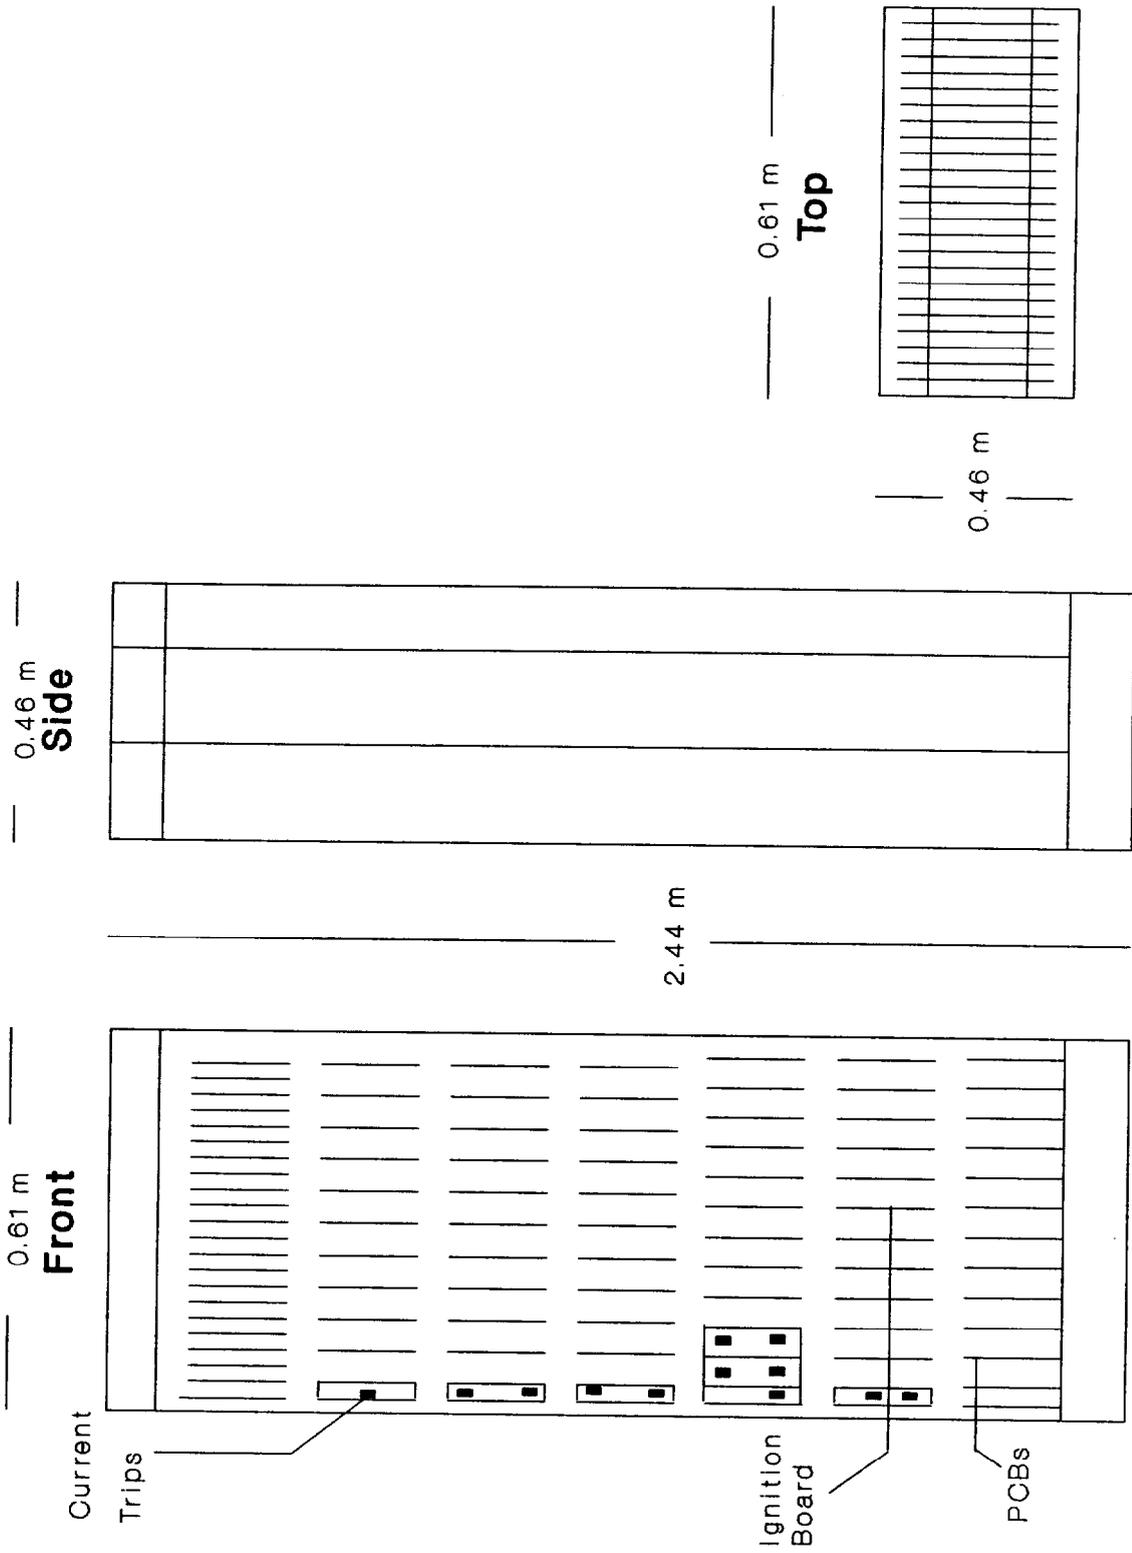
A Typical Switch Gear Bay and Position of the Ignition Board
